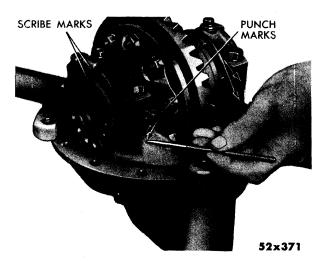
Marking Bearing Caps and Adjusting Nuts
